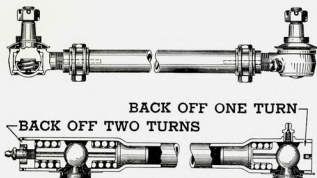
Top View Shows One of the Two Tie-rods. Lower View is the Drag Link
